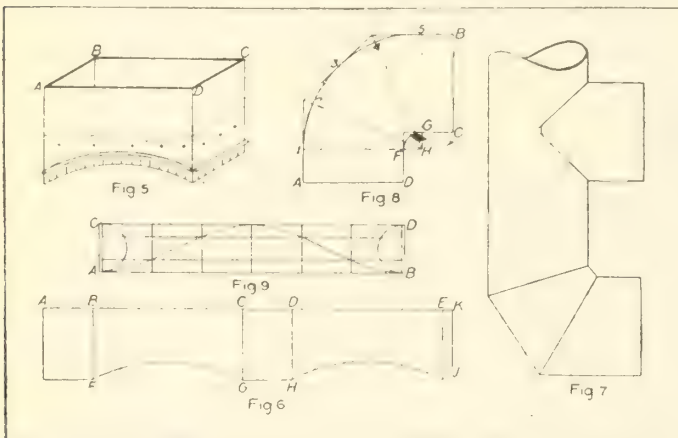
Laying out cold-air inlet connection. Fig. 6.—Developing pattern. Fig. 7.—Elbow and tee joint. Fig. 8.—Laying out elbow. Fig. 9.—Developing elbow pattern.
